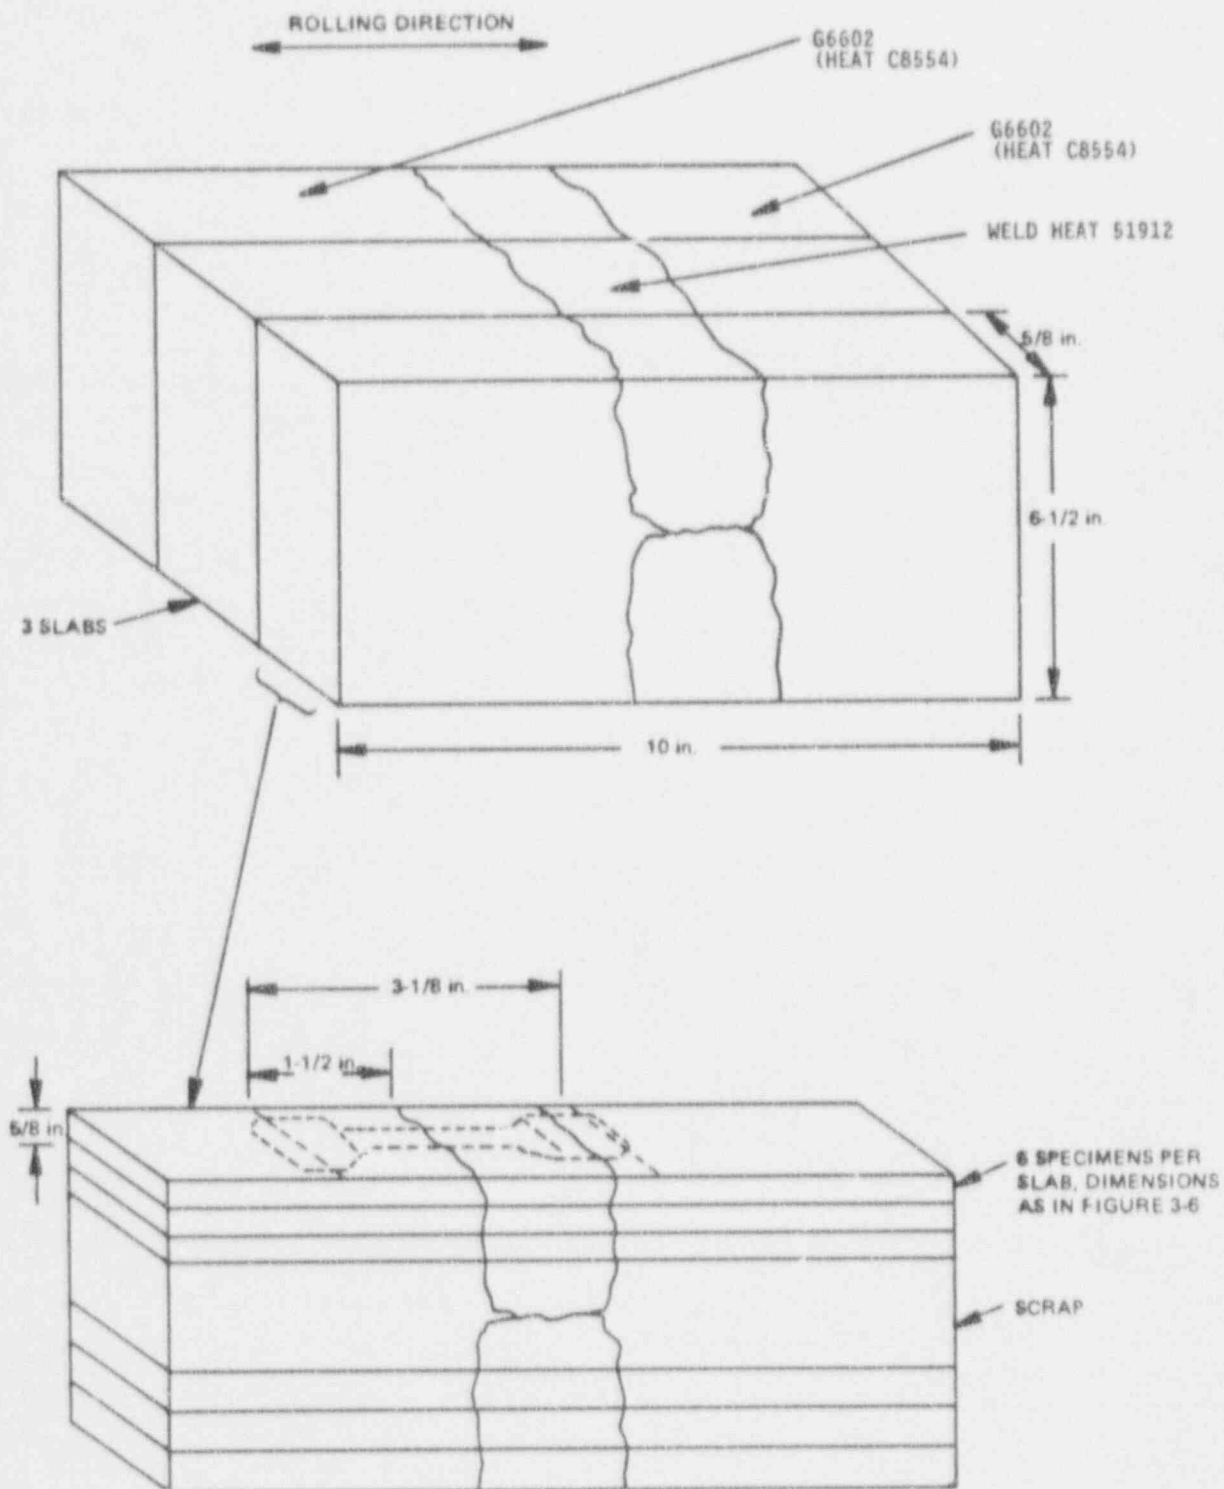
Fabrication Method for HAZ Tensile Specimens
